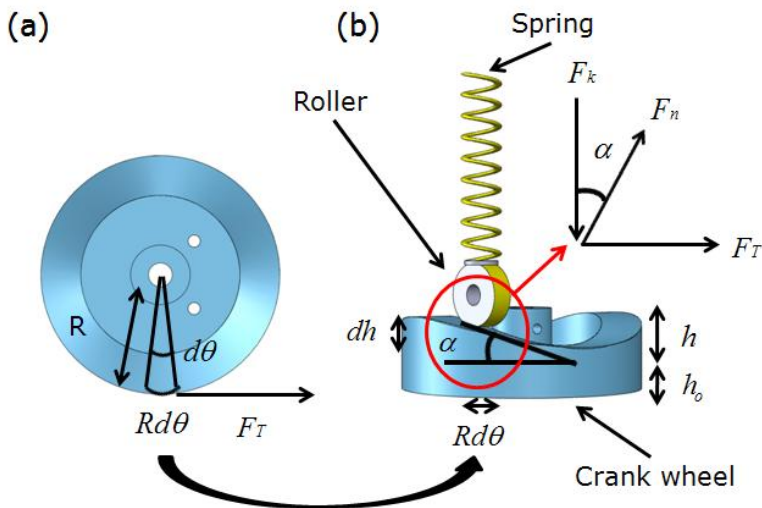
Free body diagram of crank wheel (a) Front view (b) Side view.
